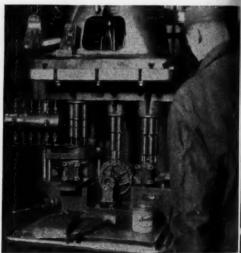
Tapping 14 holes in the compressor bely. Six of the taps are guided by means of bushings, all being supplied from a Lunkenheimer oiler.
